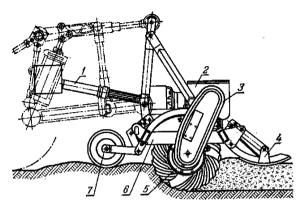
Mill FBN-1,5: 1 - a shaft from tractor; 2 and 3 - reducers; 4 - the terminator of depth of soil processing; 5 - a milling drum; 6 - a frame; 7 - a basic wheel
